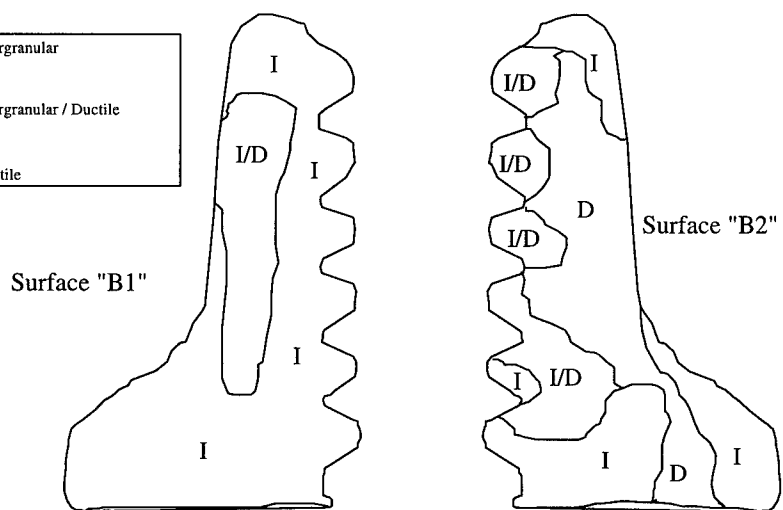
Map of failure modes of fracture surfaces of Nut "B"
